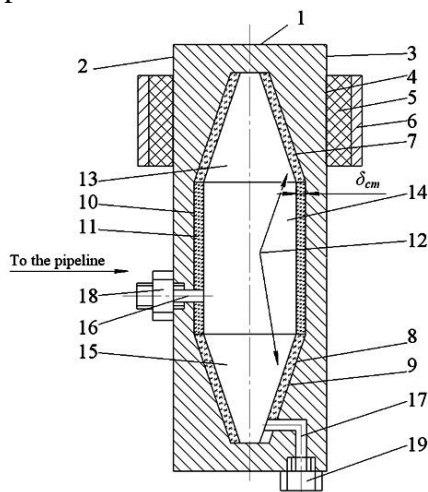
Schematic representation of a single-chamber disc-shoe brake of a drilling winch with a system and method of forced air-nano-liquid cooling: 1, 2 and 3 brake disc with left and right halves; 4 - friction belt; 5, 6 - friction lining with a metal substrate; 7, 8 and 9 - upper and lower diffusers and their internal surfaces; 10 - modifications of capillary structures; 11 - common chamber; 12, 13, 14 and 15 - zones: two evaporations, combined transport and condensation; 16, 17 - openings-channels; 18, 19 - inlet and outlet valves
